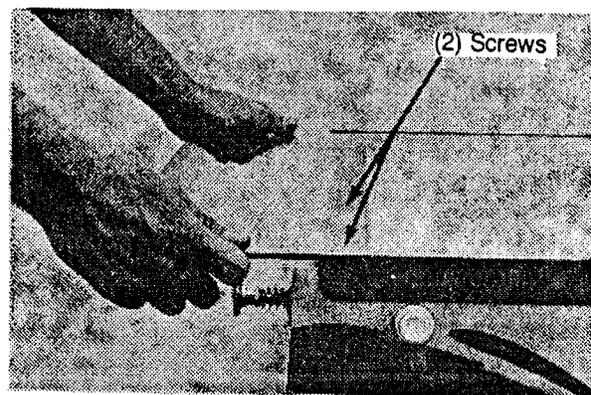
Sliding out the glass. Remove the two screws shown, then carefully slide out the glass.
